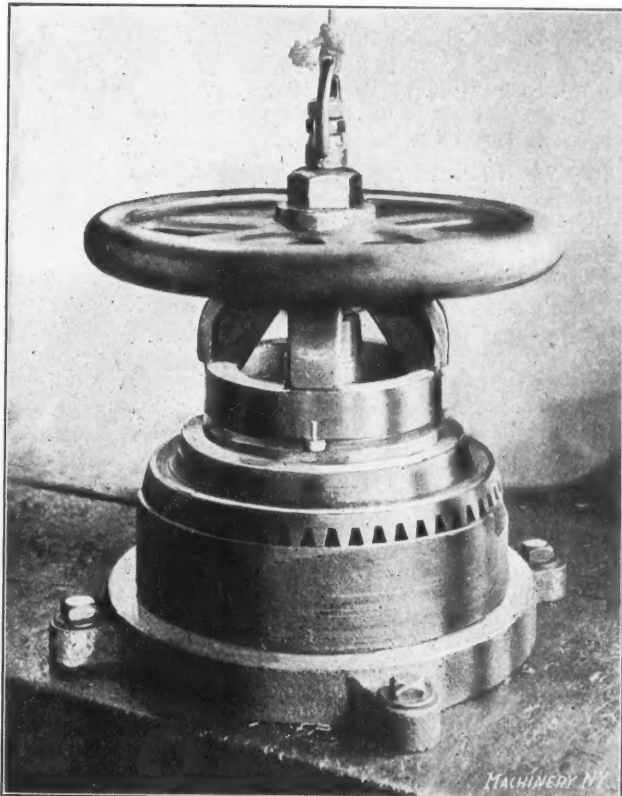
A Convenient Fixture for Assembling the Gears on the Gear Case
